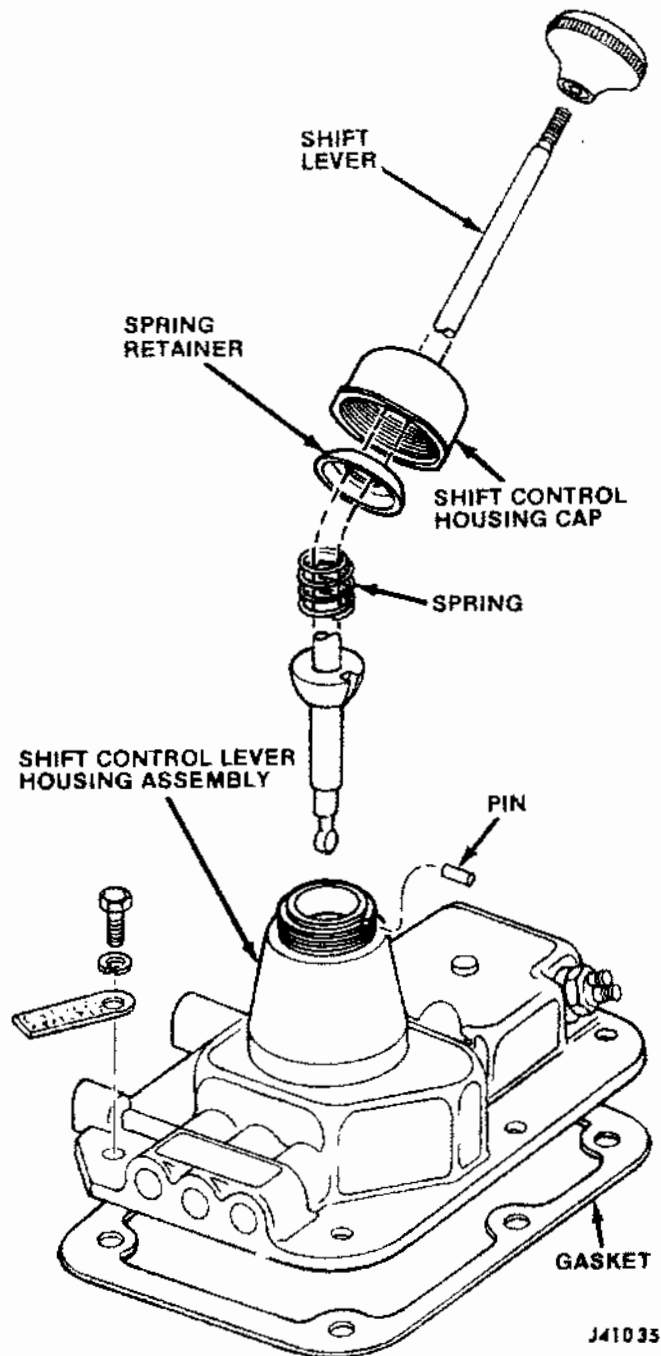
Shift Control Lever Housing Assembly Removal - 4-Speed Transmission
